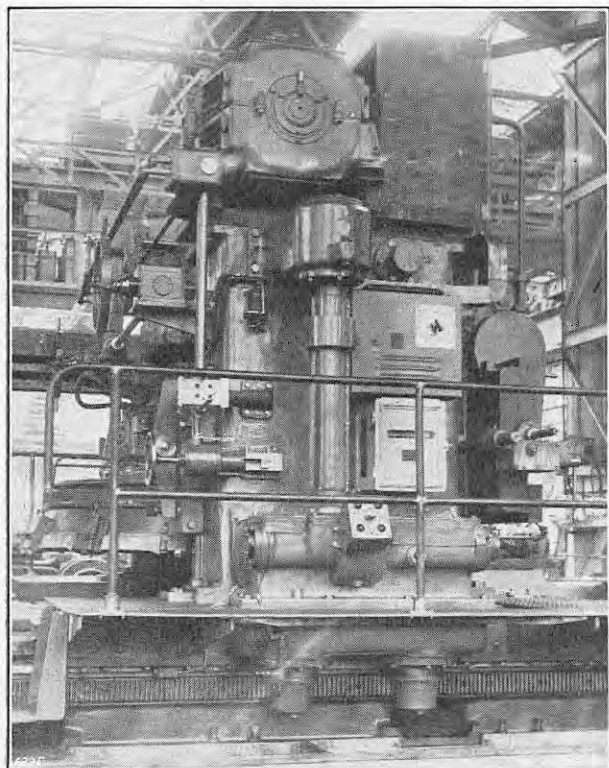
SIDE OF ONE MACHINE UNIT, SHOWING DRIVE FOR LONGITUDINAL FEED.
